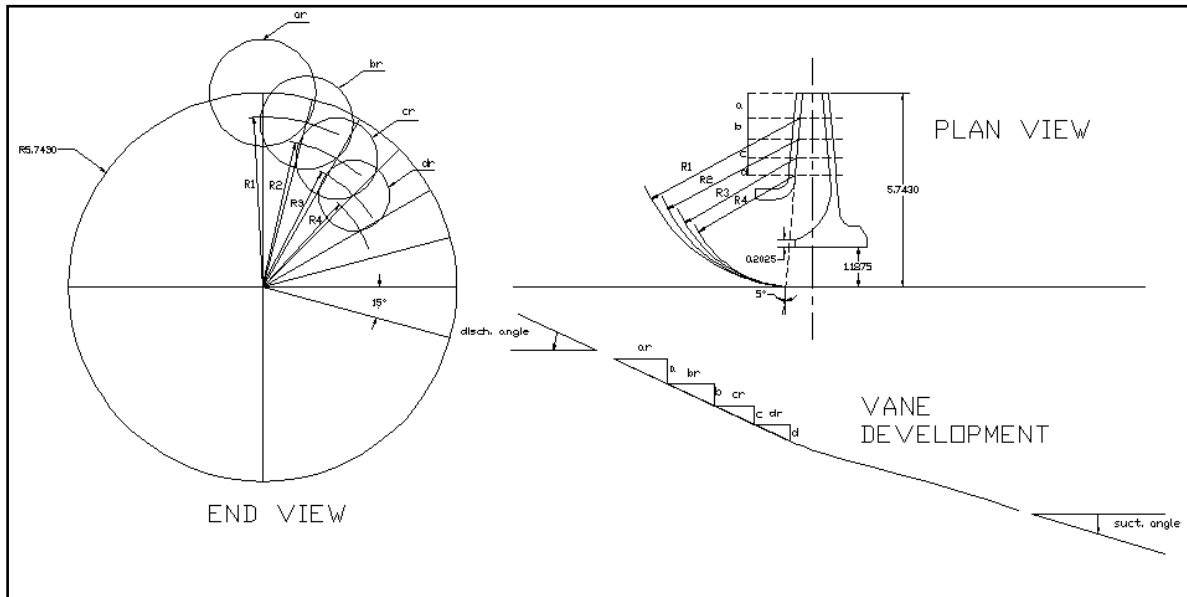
Two Dimensional Drawing of Impeller End View, Plan View, and Vane Development
